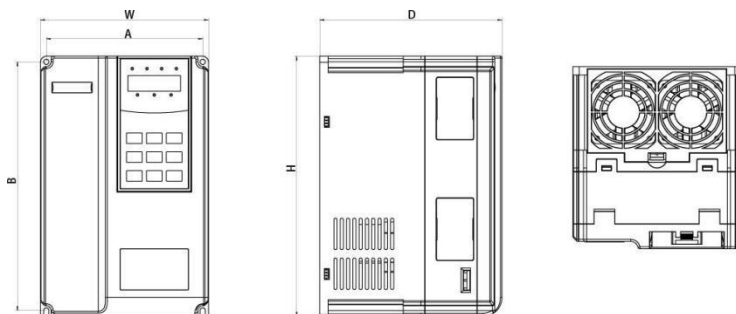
Schematic diagram of external dimension and mounting dimension of plastic structure
